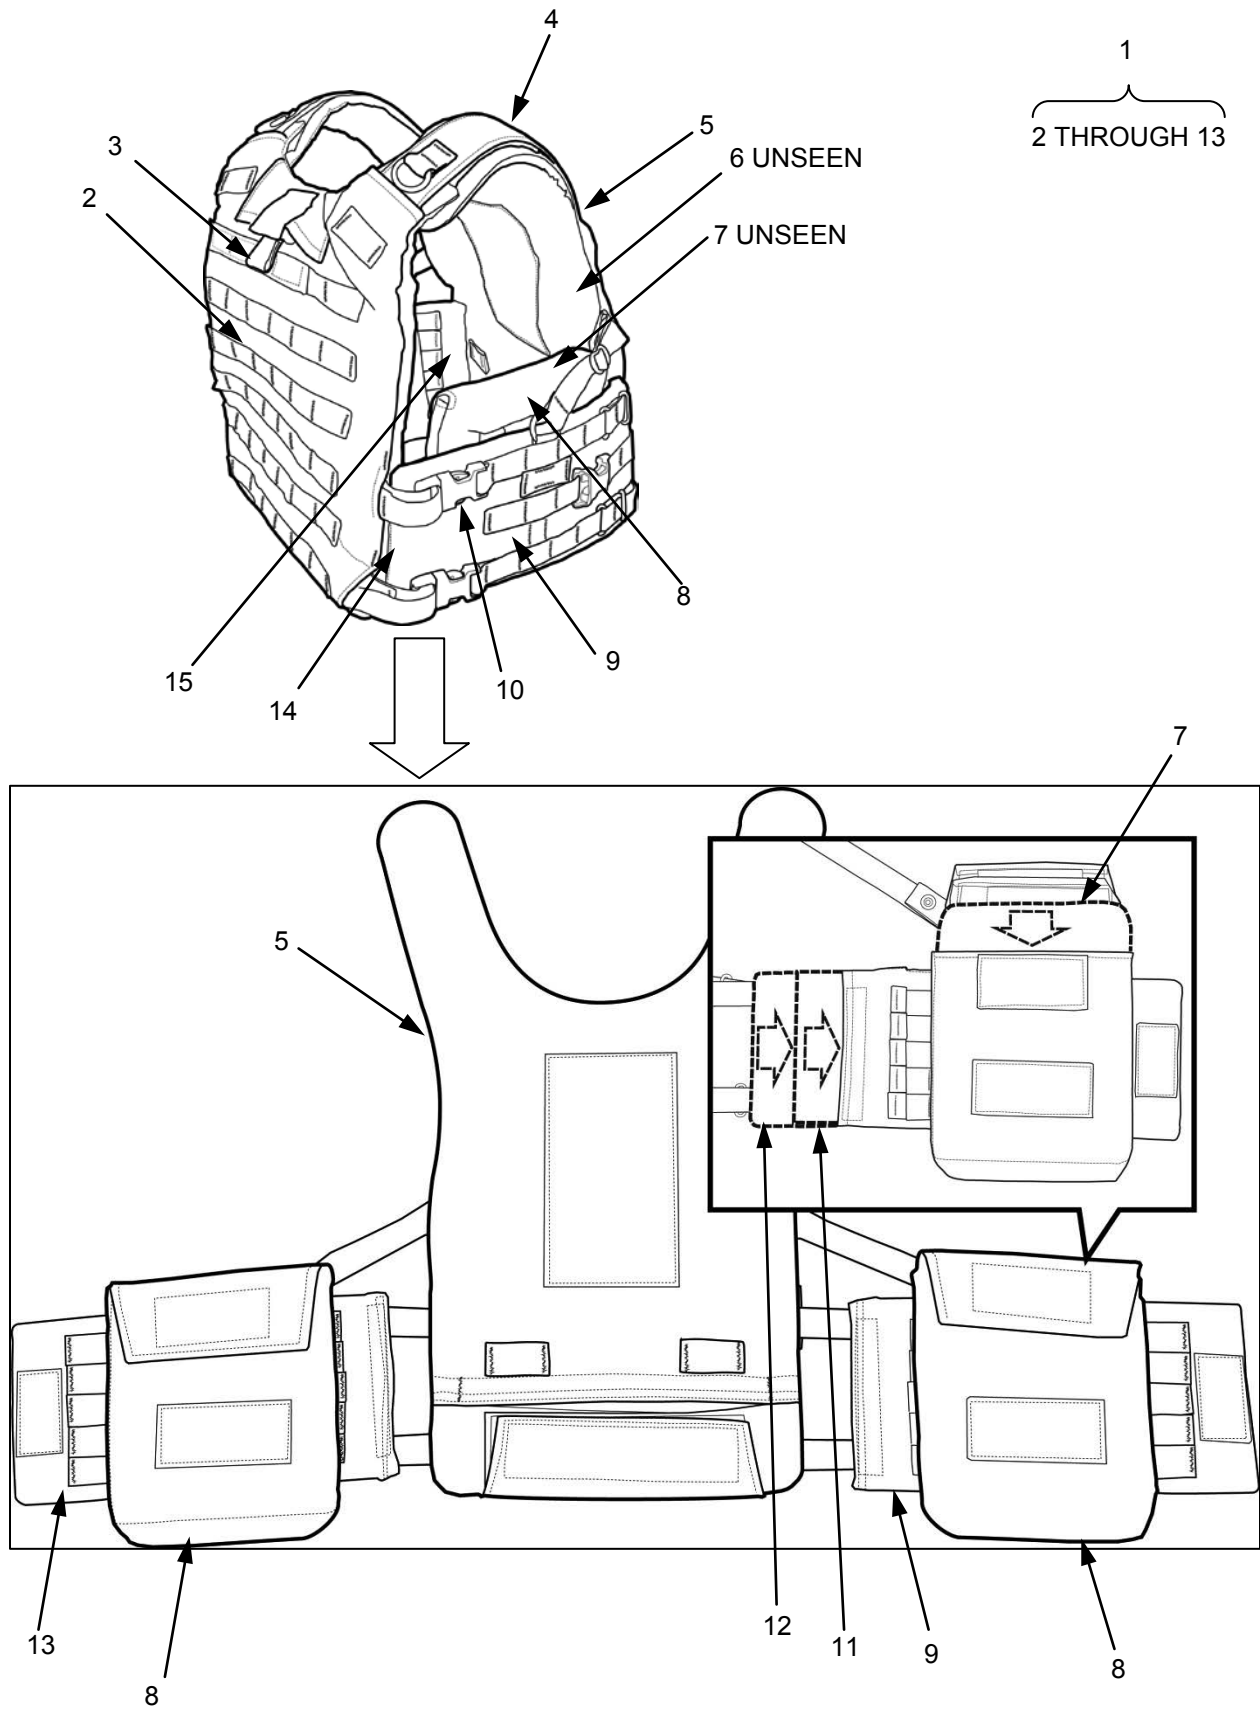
Soldier Plate Carrier System (SPCS) (Sheet 2 of 4).
